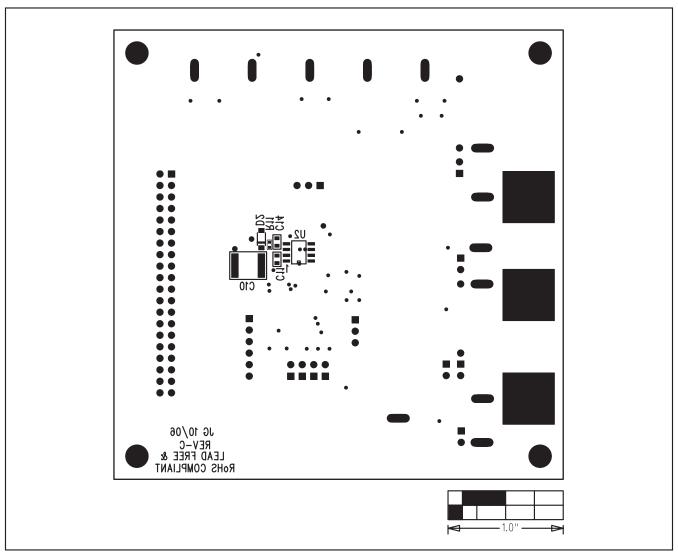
MAX5661 EV Kit Component Placement Guide—Solder Side
